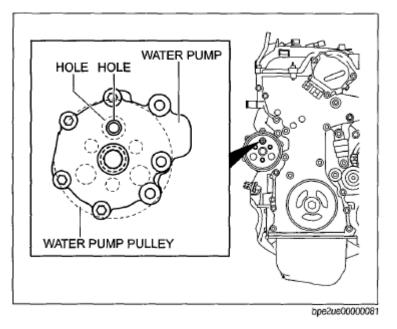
Identifying Alignment Marks On Water Pump Pulley Hole With Water Pump Hole
